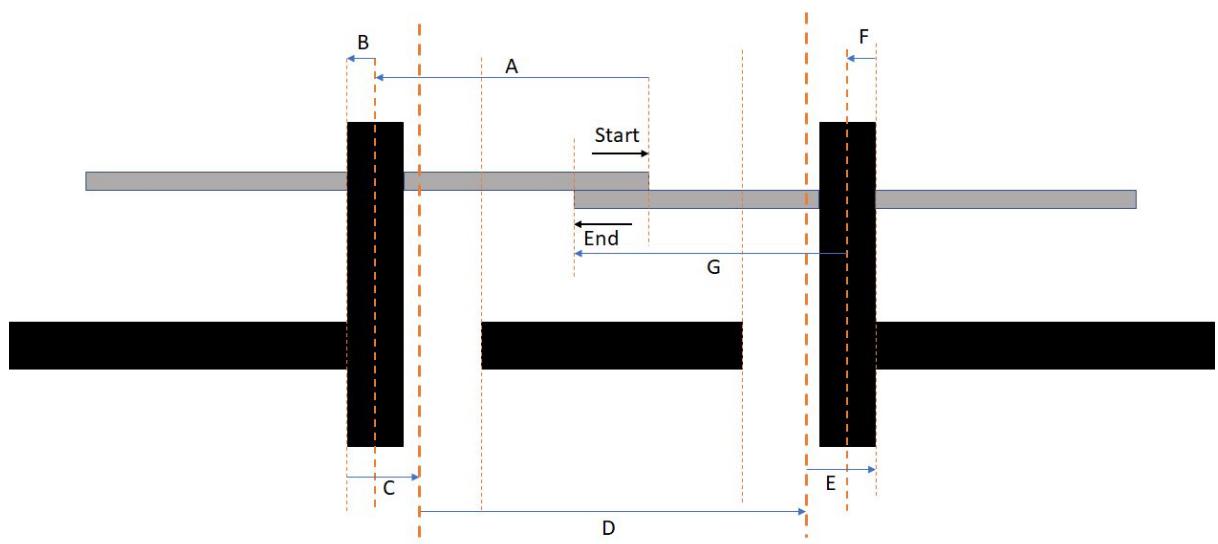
Exaggerated depiction of the assembly of the blades (in grey) and chassis (in black)
